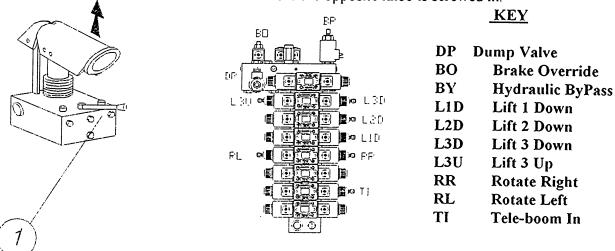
Emergency Handpump - Hydraulic valve block.
